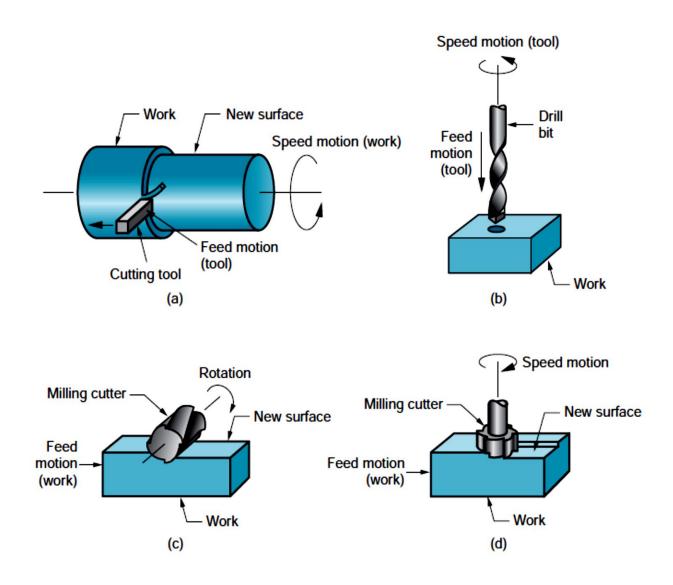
three principal conventional machining operations: (a) turning (b) drilling and two forms of milling, (c) peripheral milling (d) face milling
